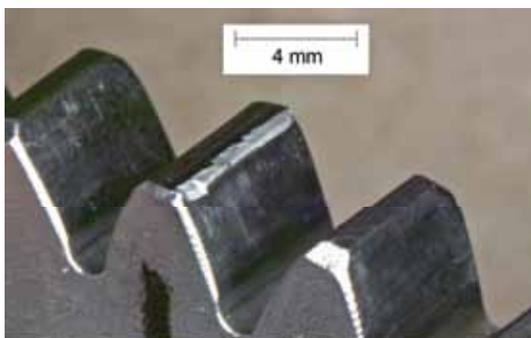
Example of damaged tooth tip after engagement of 1.96 mm (0.077 in.) diameter drill bit shank.
